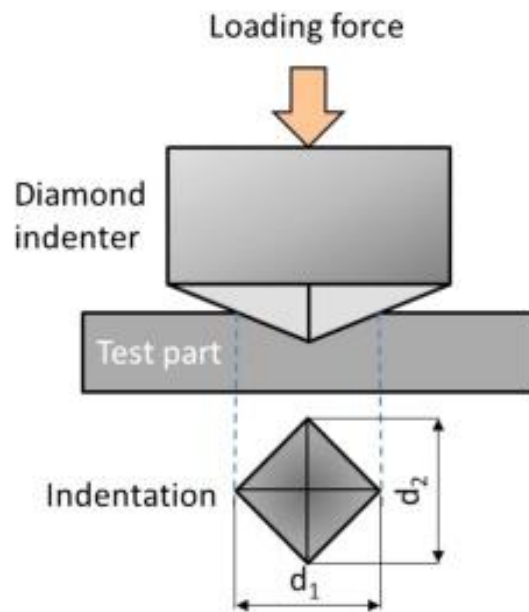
A schematic of Vickers hardness testing. A force is applied to a sample's surface with a diamond shaped indenter, leaving a diamond-shaped indent on the surface with corner-to-corner dimensions of d_1 and d_2 [18].
